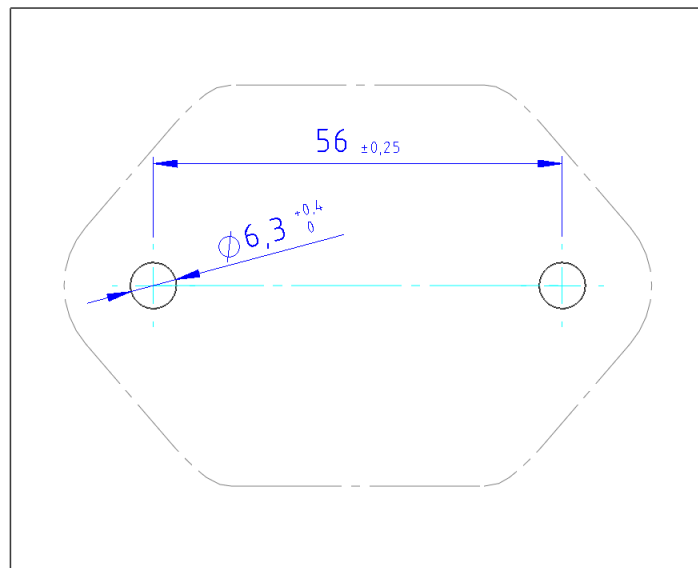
Recommended through hole dimension & distance for mounting of sensor module
